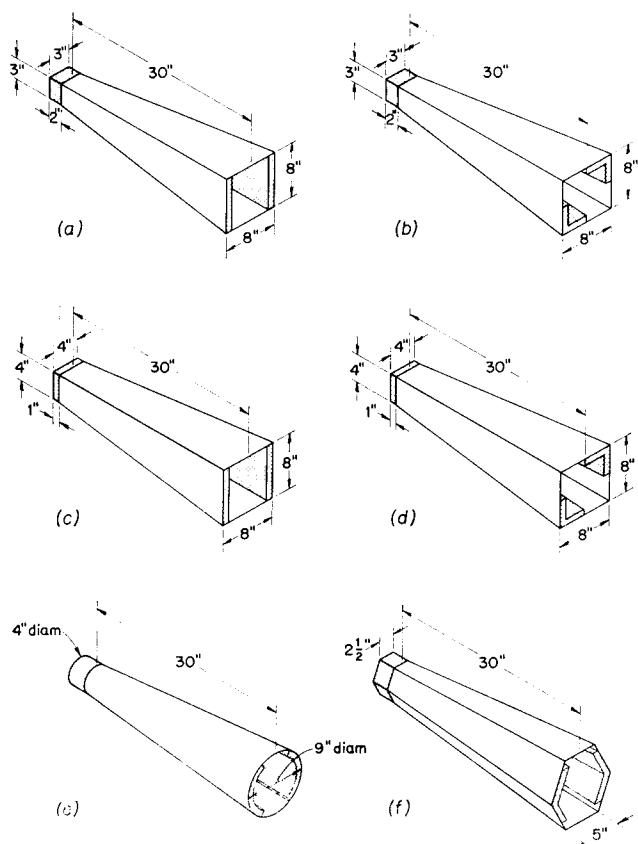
Basic candles tested showing use of HE pad and sheet explosives.
